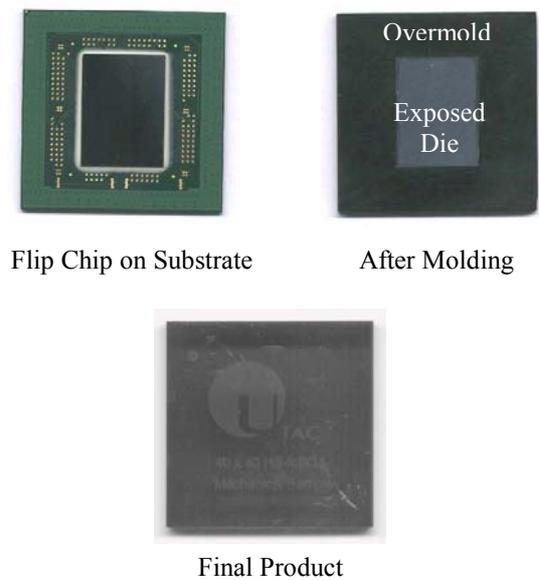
Actual Samples of Flip Chip BGA Package (New Design - B).
